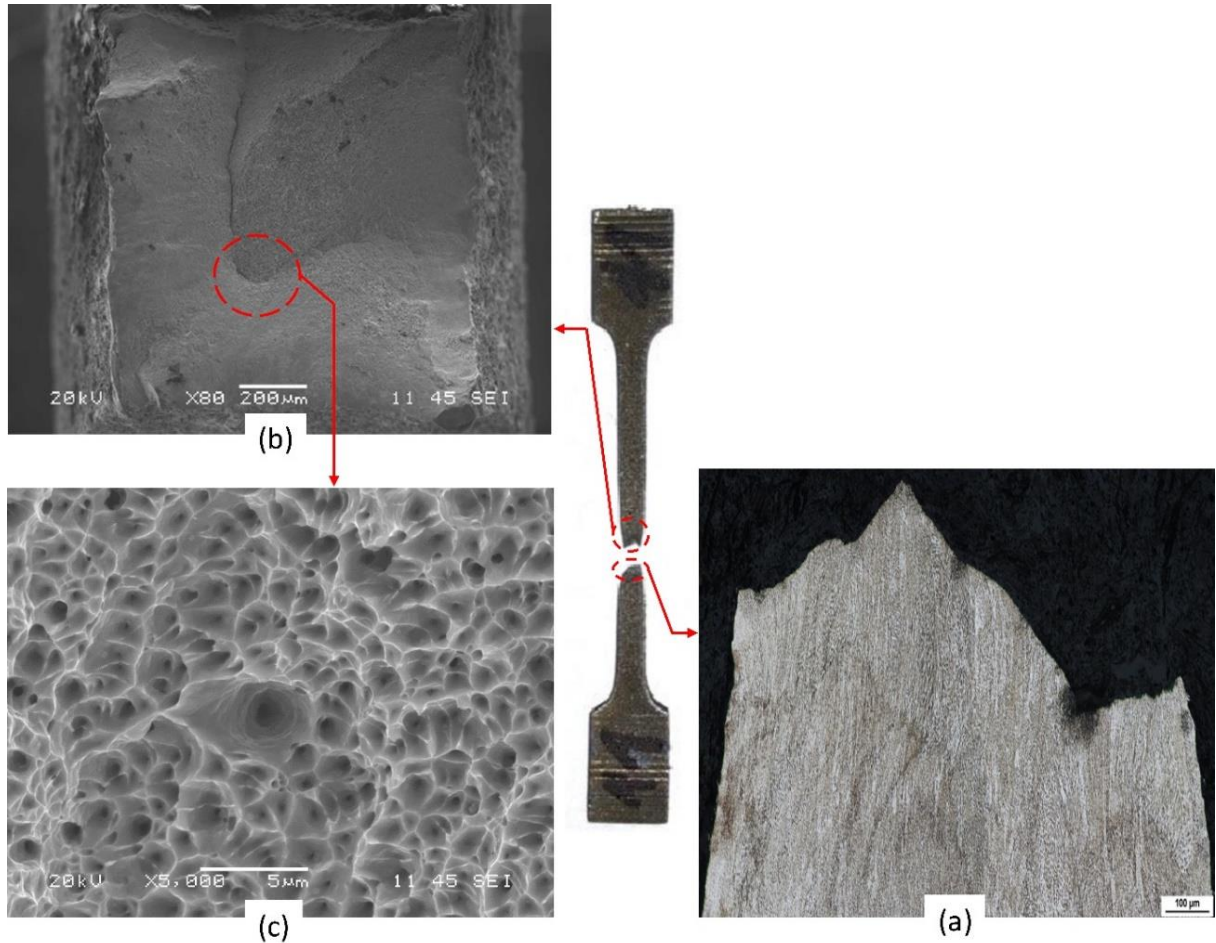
(a, b) Fracture surfaces, (c) Identified defects dominated by crack initiation
